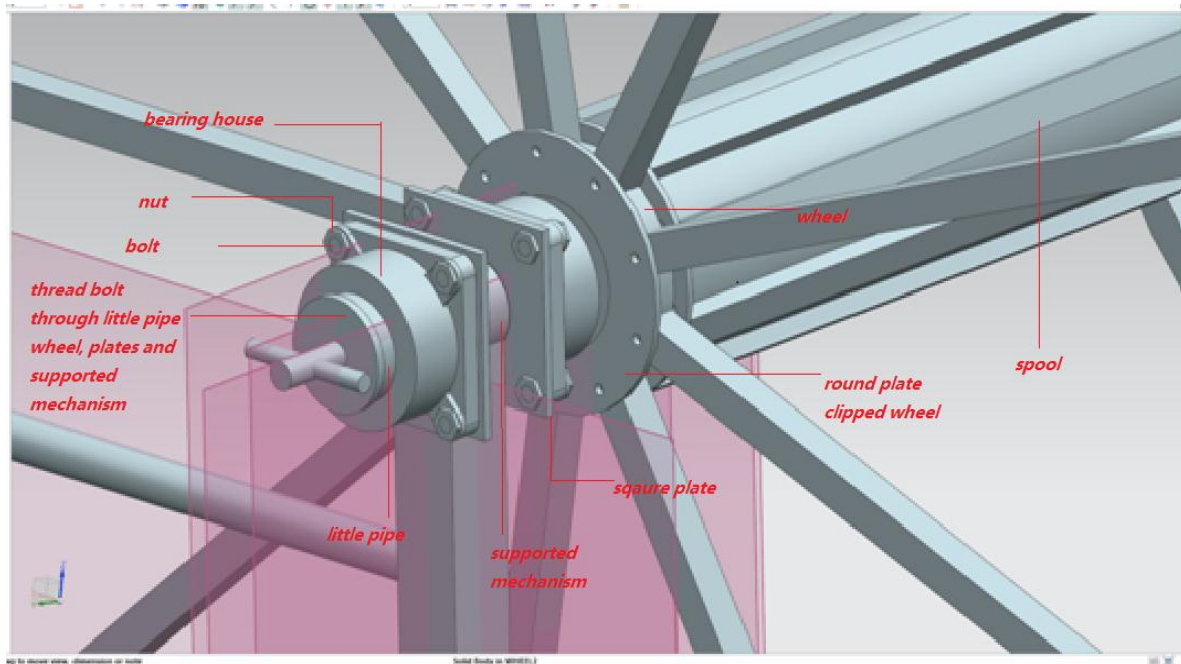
Side view of assembly of round plates, square plates, wheel, little pipe, supported mechanism and thread bolt
